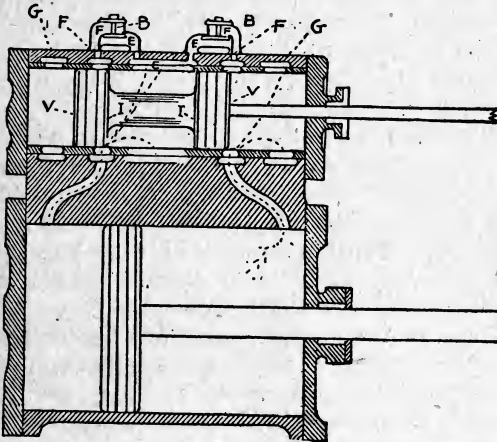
Showing Piston Valve and Cylinder By-Pass Valves, Placed on Top of Steam Chest
